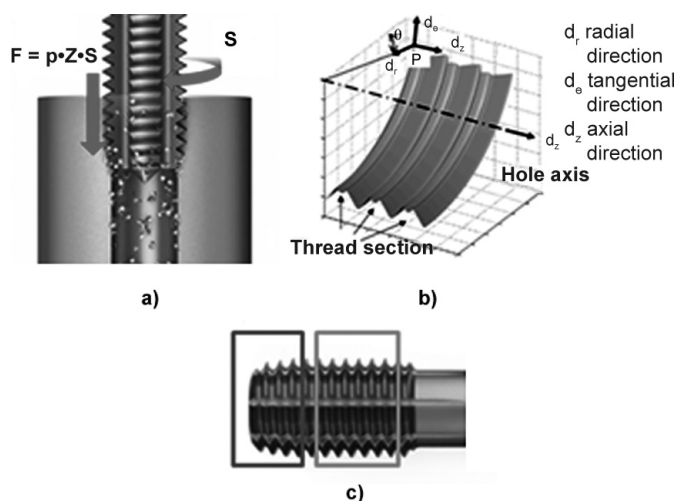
Cutting and geometrical parameters in form tapping [1]; a. Thread operation; b. Thread section; c. Geometry of a tap.
